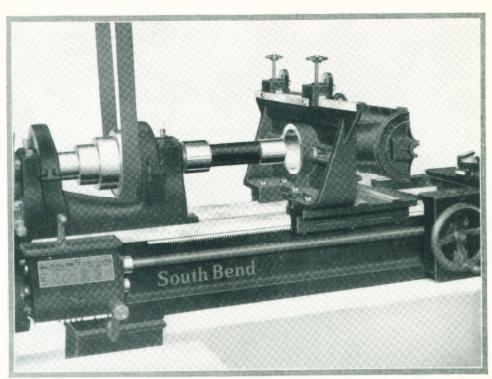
C—Reboring a Cylinder Block on the Lathe.
